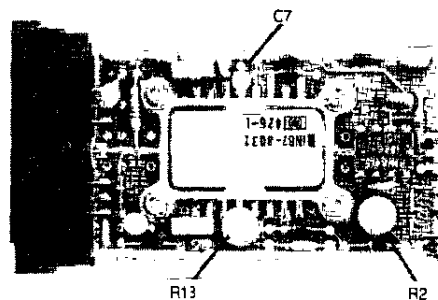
A-4. HP 54001A Probe PC Board Adjustment Locations.
